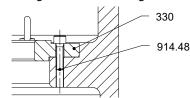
Bearing bracket fastening, motors: 275 4 300 4, 250 6 340 6 and 205 8 290 8
